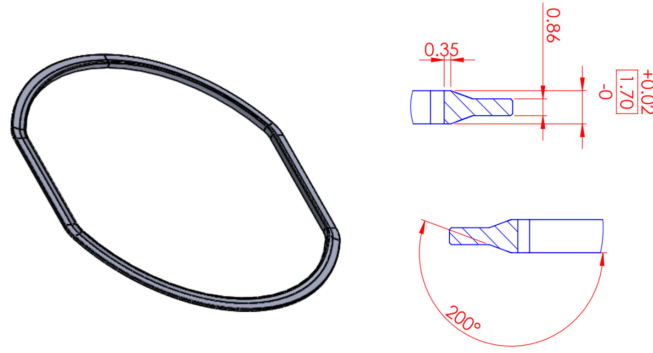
Special vacuum and RF gasket to seal Part 1 and cap.
